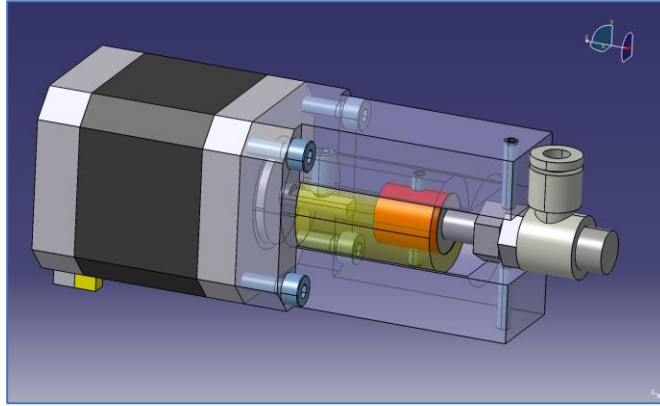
3D stepper motor assembly with control valve rendered in Catia
